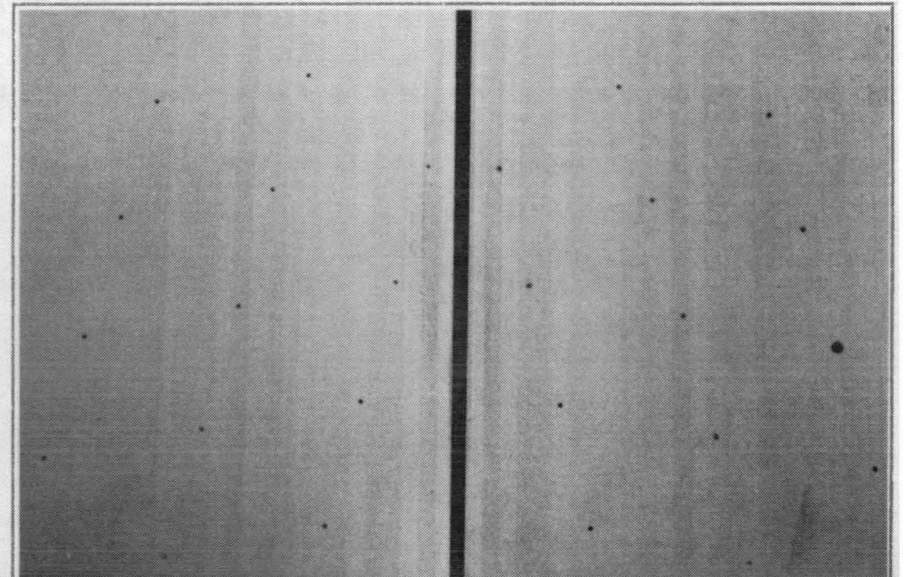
Segment 6M. View of lower surface (right) & offcut (left) showing orifices[X1.5]
